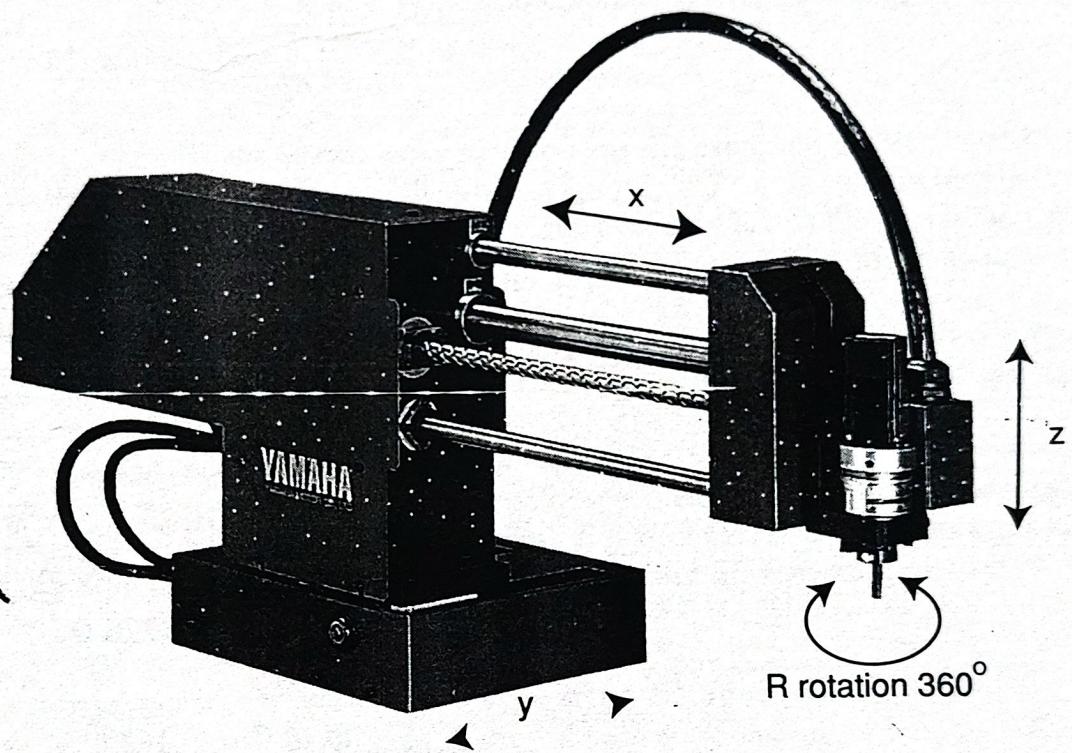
The Yamaha model YP304A Pick & Place-type robot is a four-axis unit that uses actuator stroke to position the end-of-arm tooling. (Courtesy of Yamaha Robotics, Inc.)
